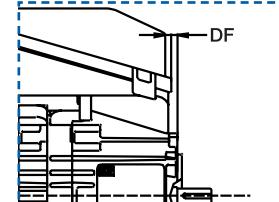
Distance between the terminal box and the pulley shoulder - Dimension DF
